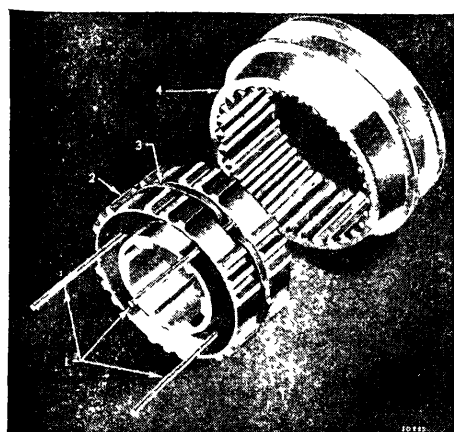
Installing synchronizer clutch gear or friction ring on 1939 models.
